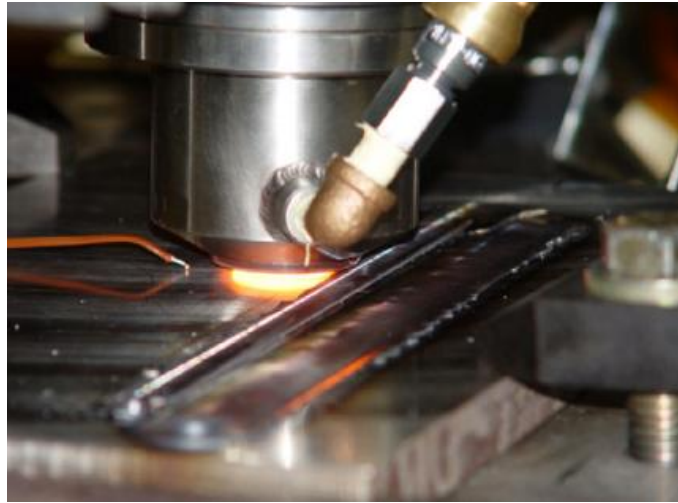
Friction stir processing with the argon gas shield [21].
